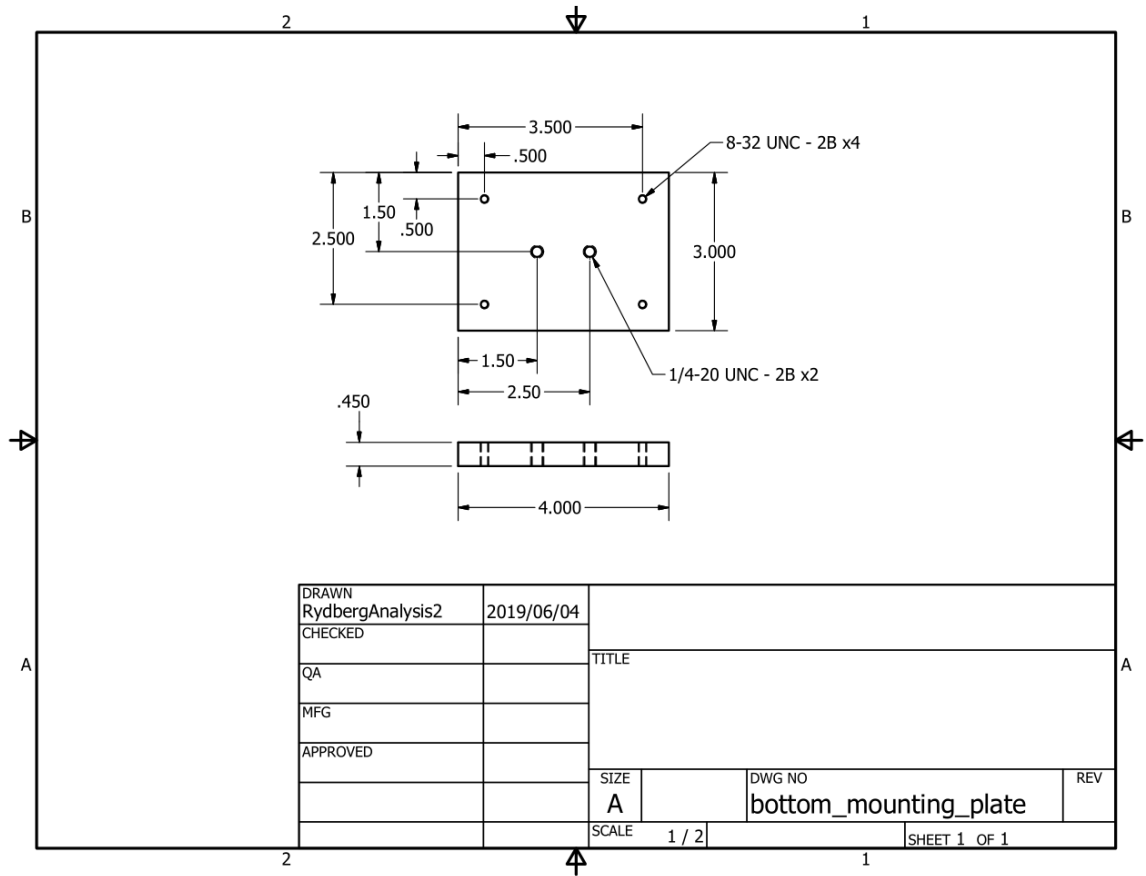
Mechanical drawing of the bottom mounting plate of the second sheet trap assembly.
